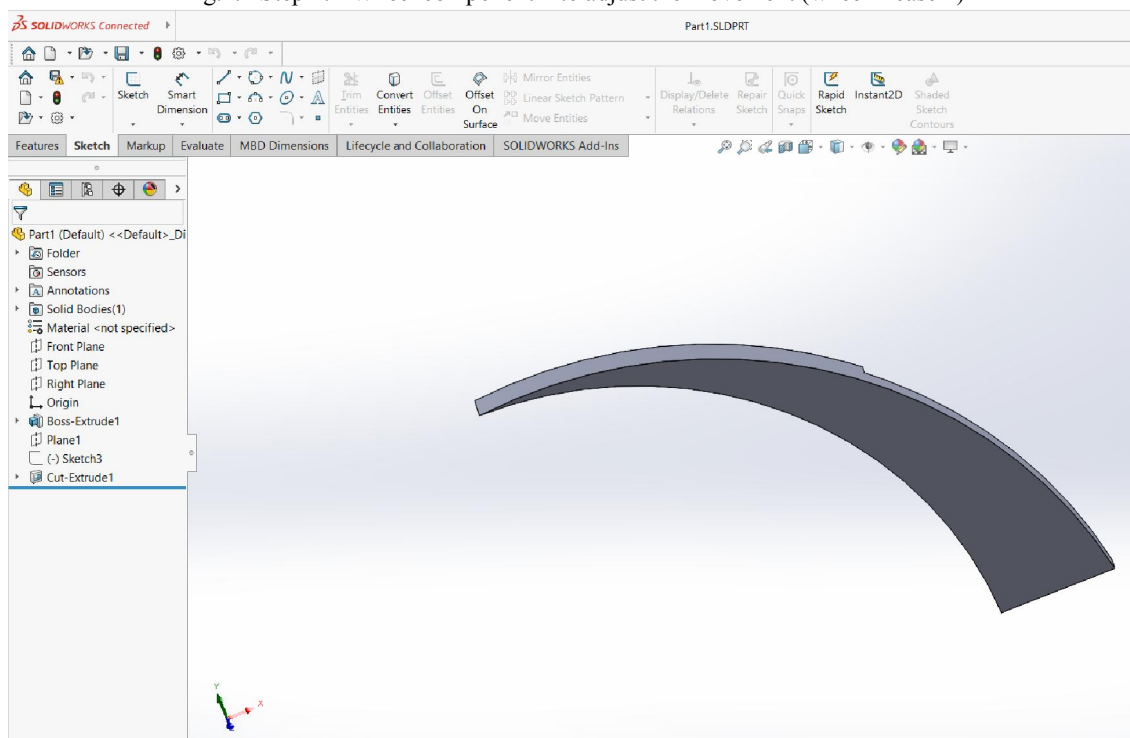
Step 5: - Wheel component 2 to adjust the movement (wheel 1 case 1)
